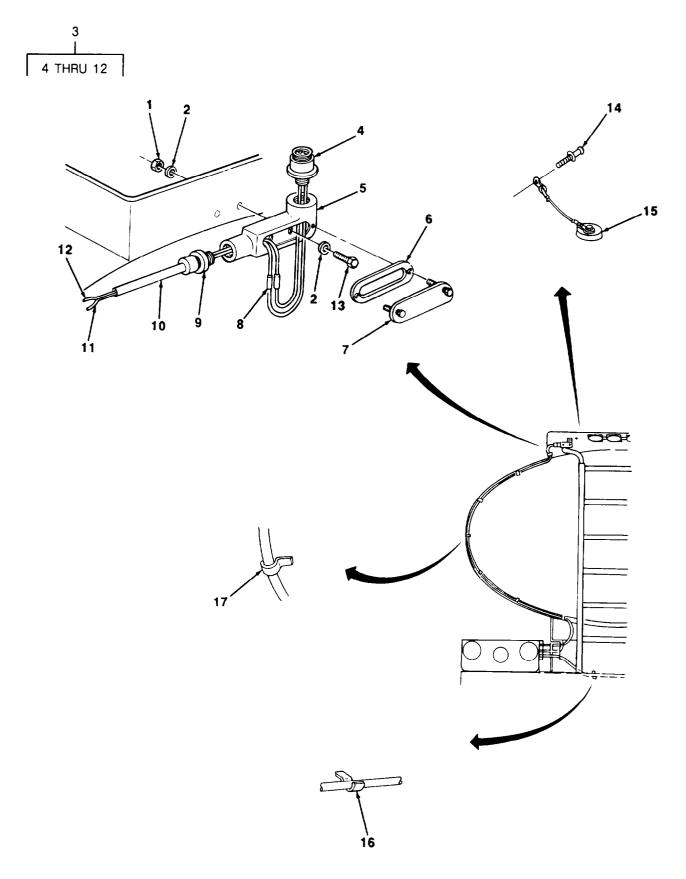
Component Parts for Convoy Warning Conduit Assembly.
